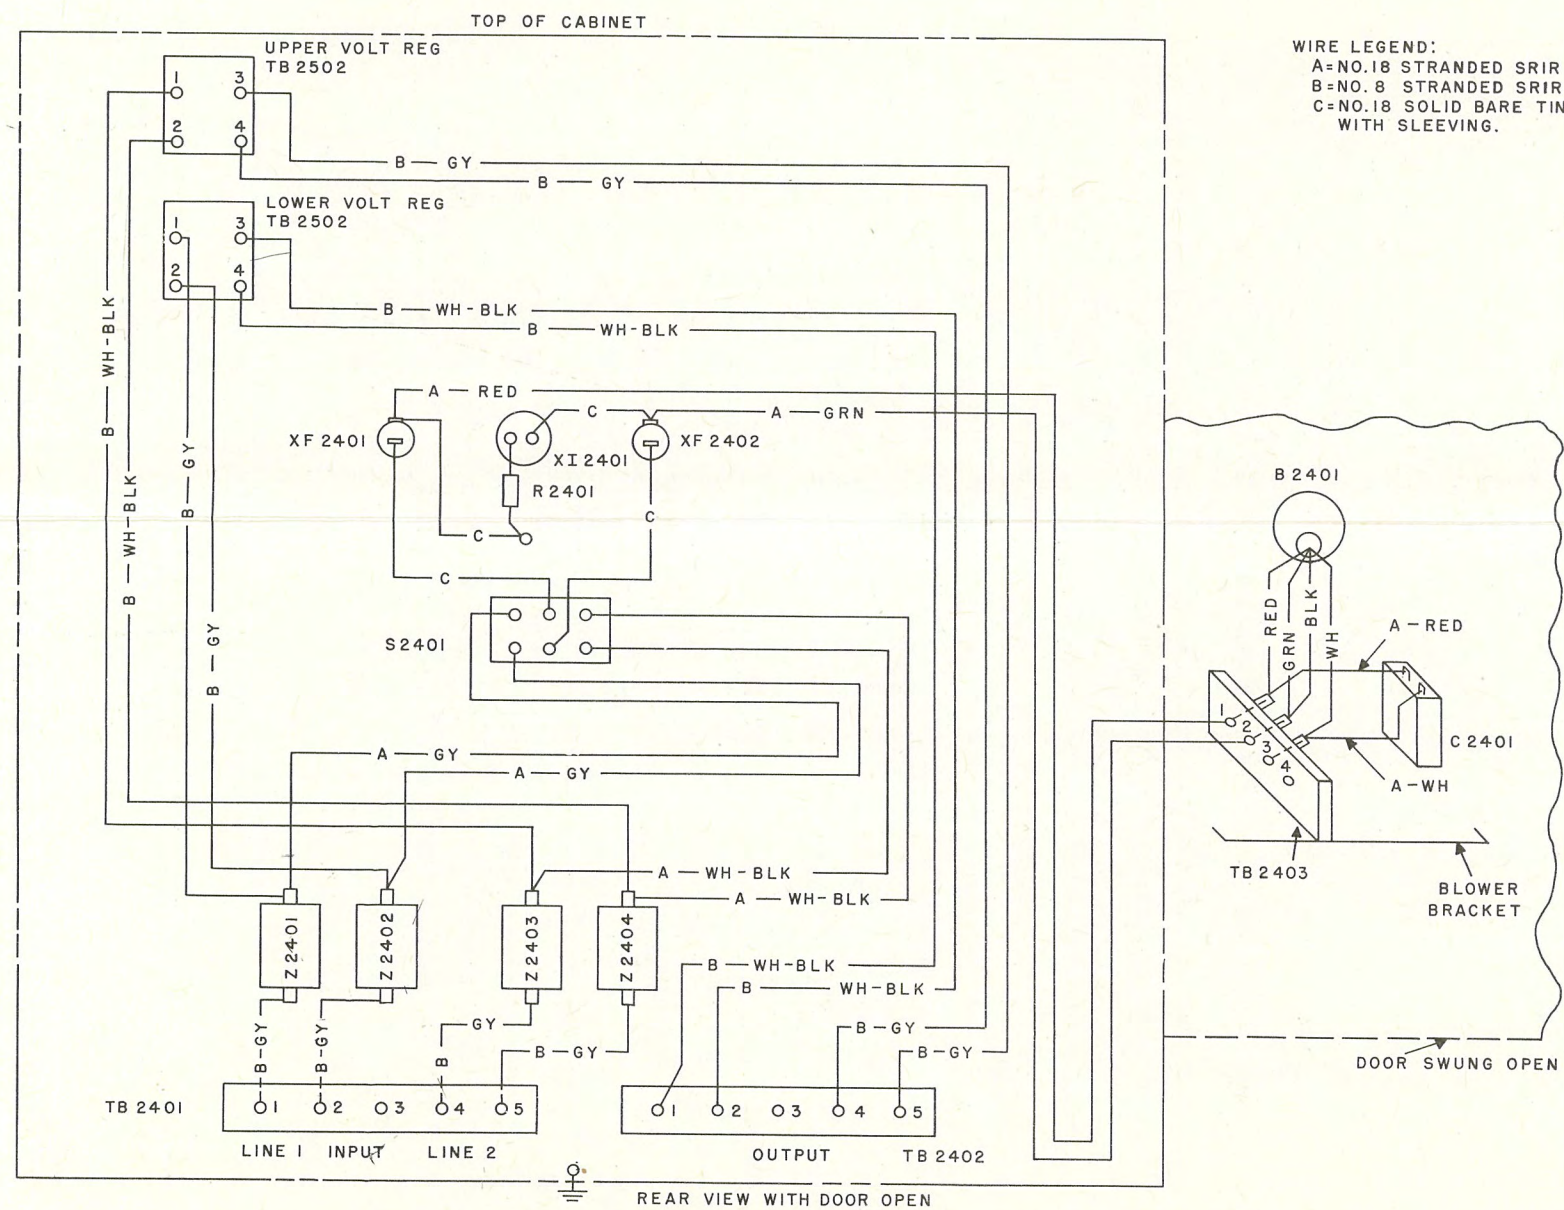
Wiring Diagram, Voltage Regulator Assembly CN-239/FPN
